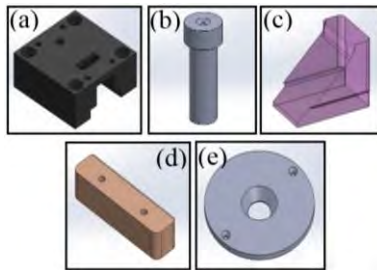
(a) Cavity plate (b) Sprue (c) Slanted glass (d) Slot (e) locating ring
